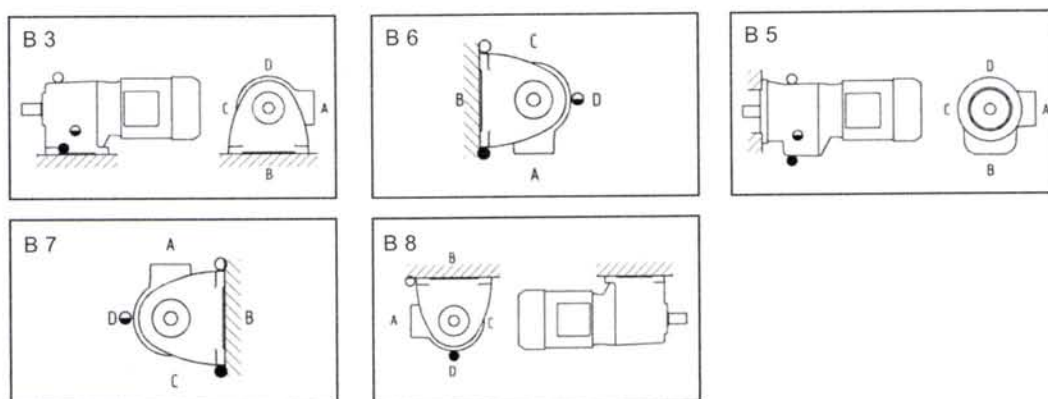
Constructions spur gear motors with horizontal shaft arrangement
